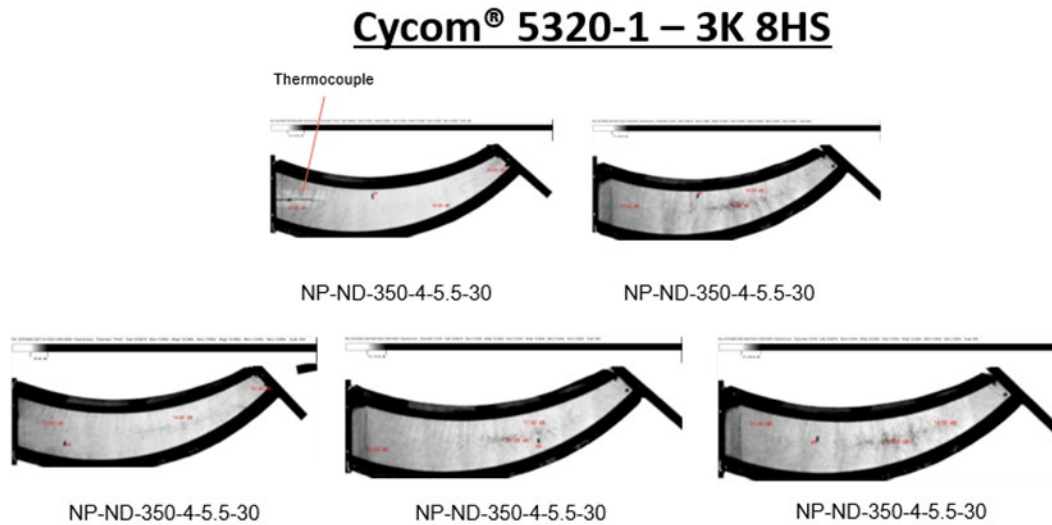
Manufacturing of C-Channel parts through compression molding using CYCOM® 5320-1 3K 8HS and Transformer Film. Repeated manufacturing of parts using same materials and processes show robustness of this high-rate manufacturing process
